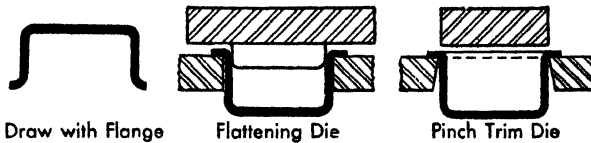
Pinch-trim die. Produces shell with uniform height, but inside edge is considerably rounded. The flange must be flattened to a sharp corner, requiring one or two sides.
